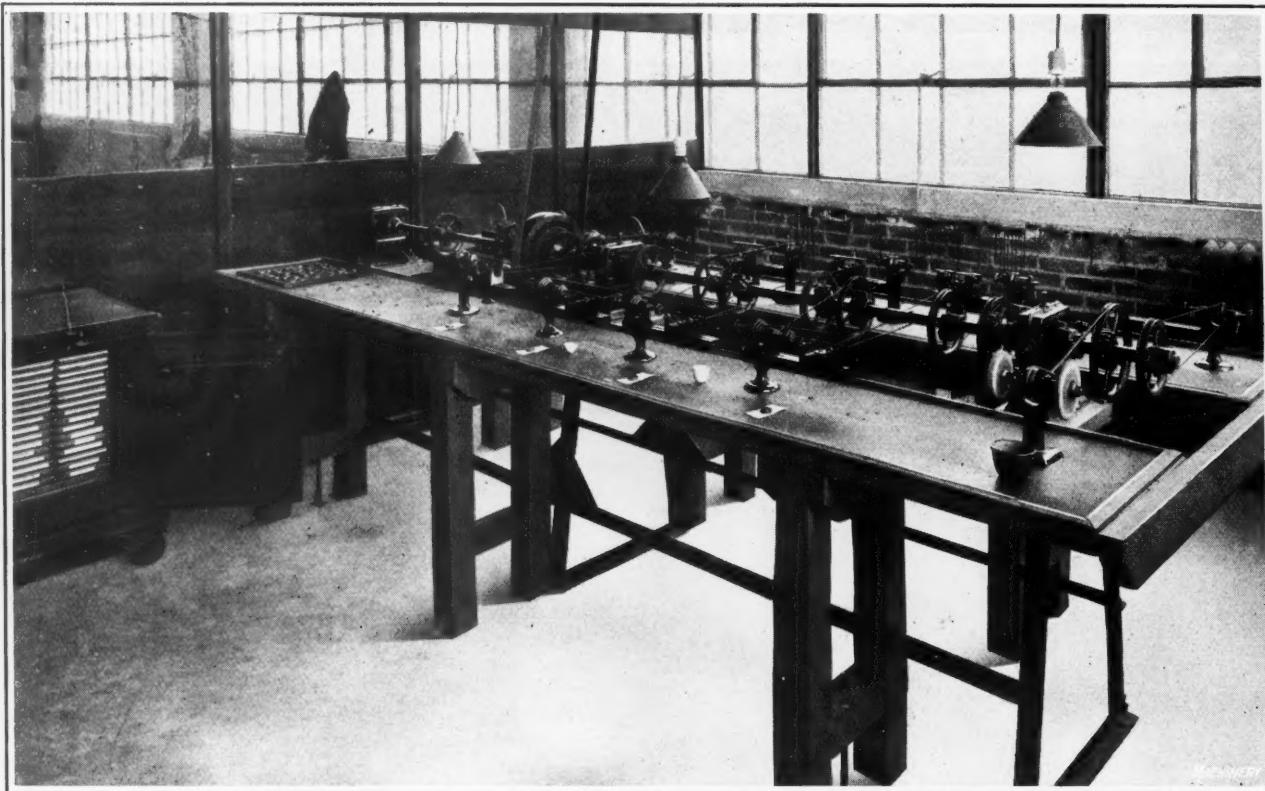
Corner of the Diemaking Room where the Drawing Hole is lapped through the Diamonds
